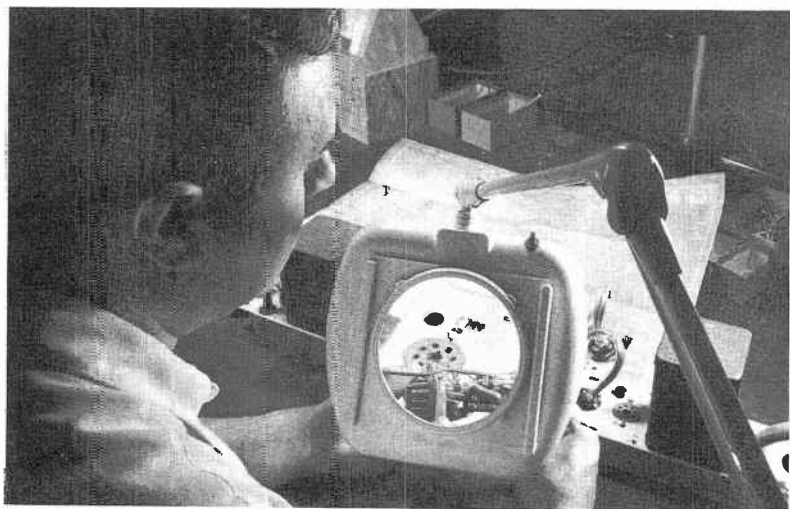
Illuminated magnifying glass permits small parts to be inspected. (Courtesy of Curtiss-Wright Corp.)
